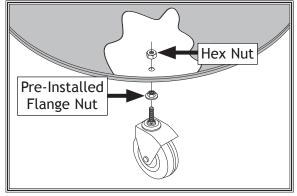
Cut-away illustration of 2" swivel caster attachment to collection drum.
